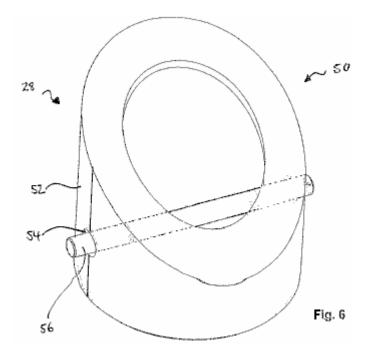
is a perspective view showing a socket lining of a stator or a rotor.
